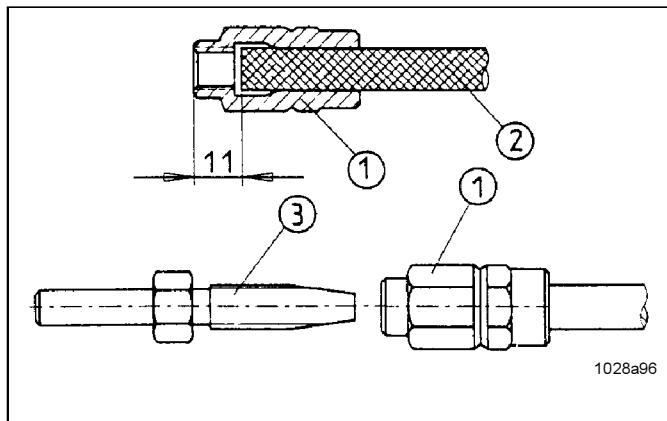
Preassembly of threaded sleeves and hose studs on the high-pressure hose
